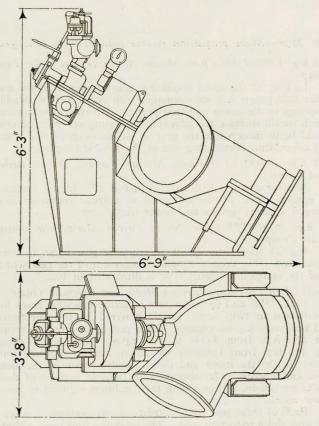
72 h.p. marine turbo-circulating pump with 16,000/775 r.p.m. epicyclic gear
